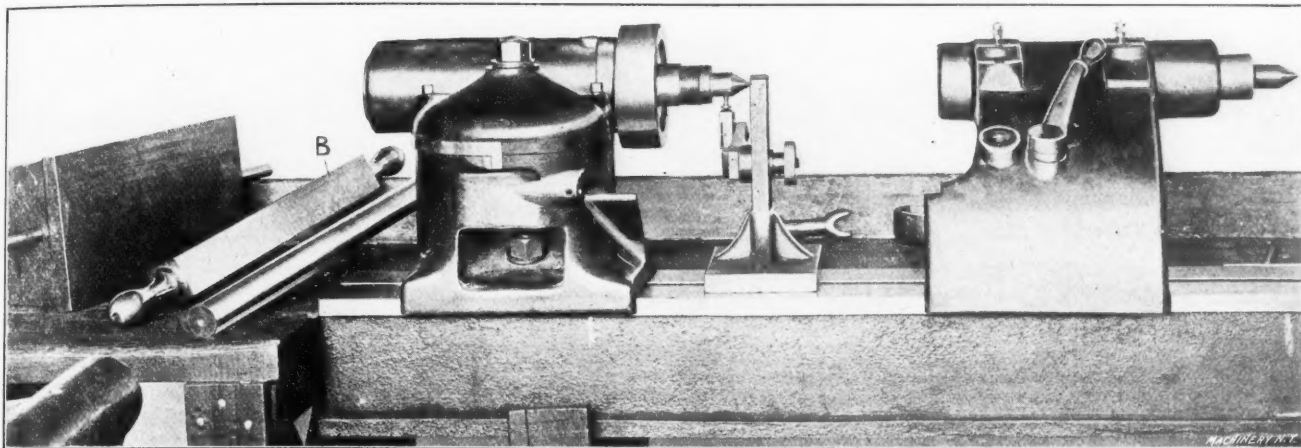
Preliminary Test to determine Parallelism of Headstock and Tailstock Spindles with Base
